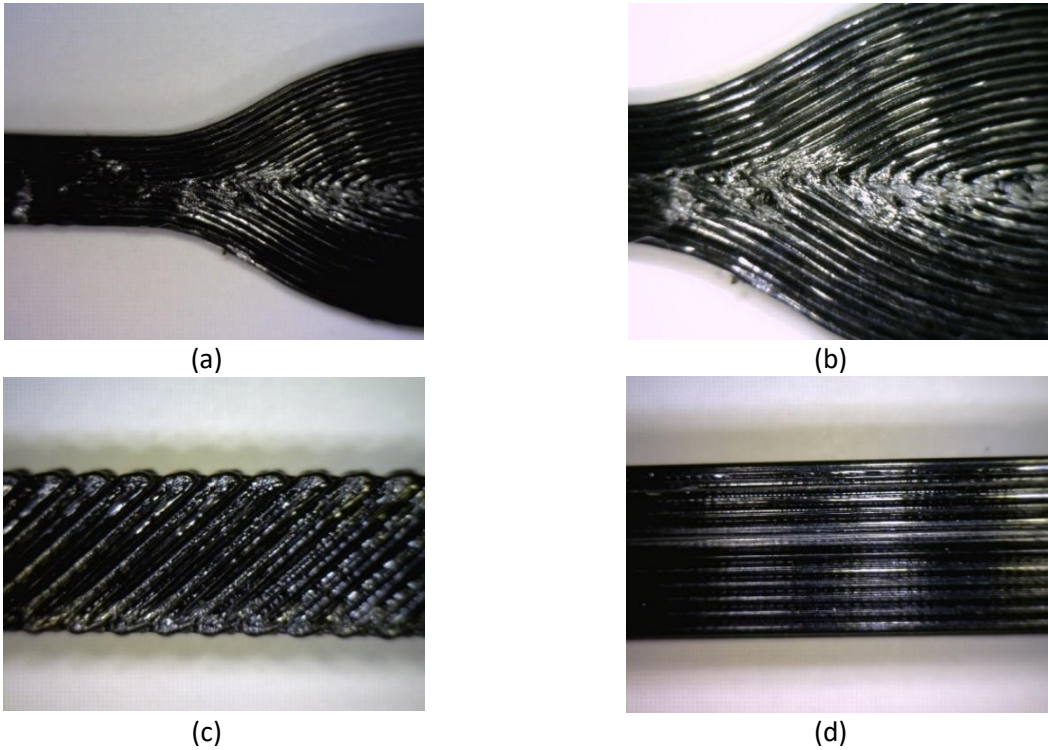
3D printed tensile specimens; a) a dog bone specimen; b) zoomed-in view showing discontinuities; c) infill only specimen; d) wall-only specimens.
